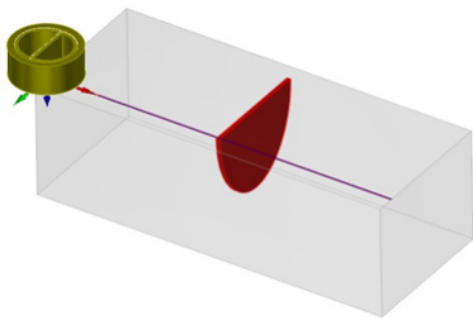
Typical shape of fatigue crack at the center of J85 compressor blade tang
